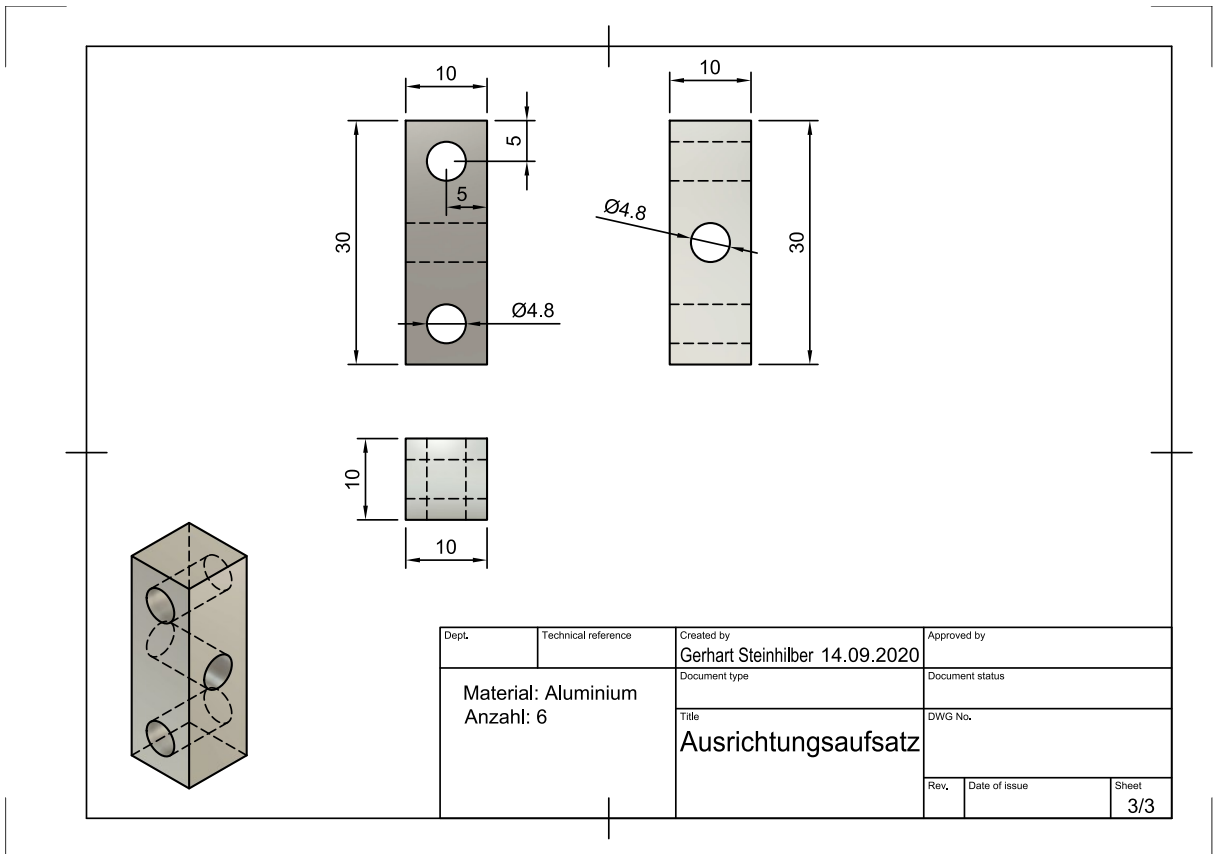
Technical drawing of the attachment for alignment of LaBr₃:Ce detectors.
